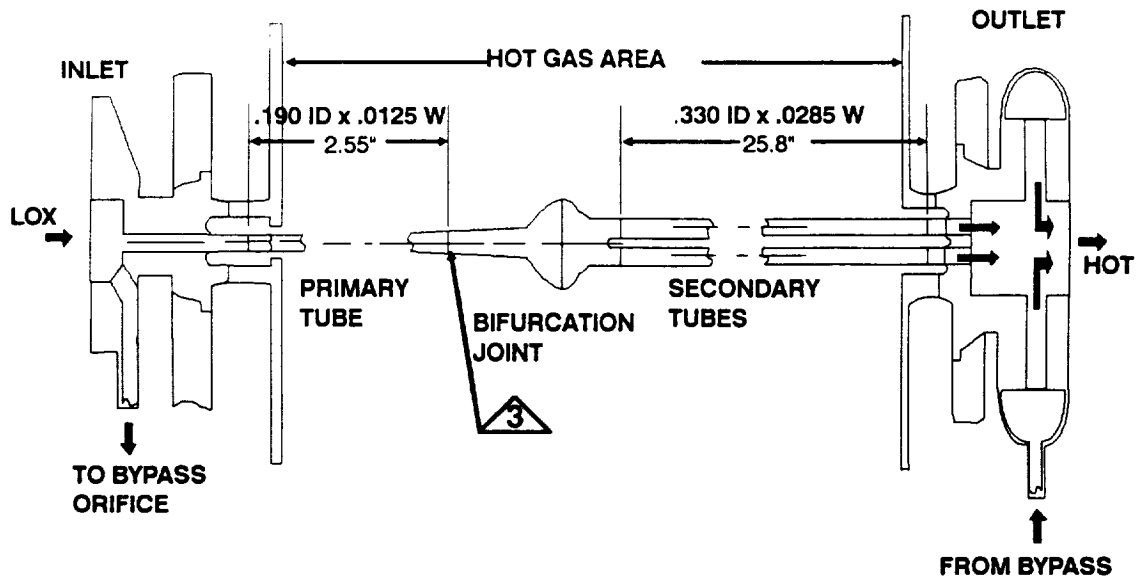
Detail of the HPOTP Heat Exchanger Coil Small Tube Outlet Near Weld 3
